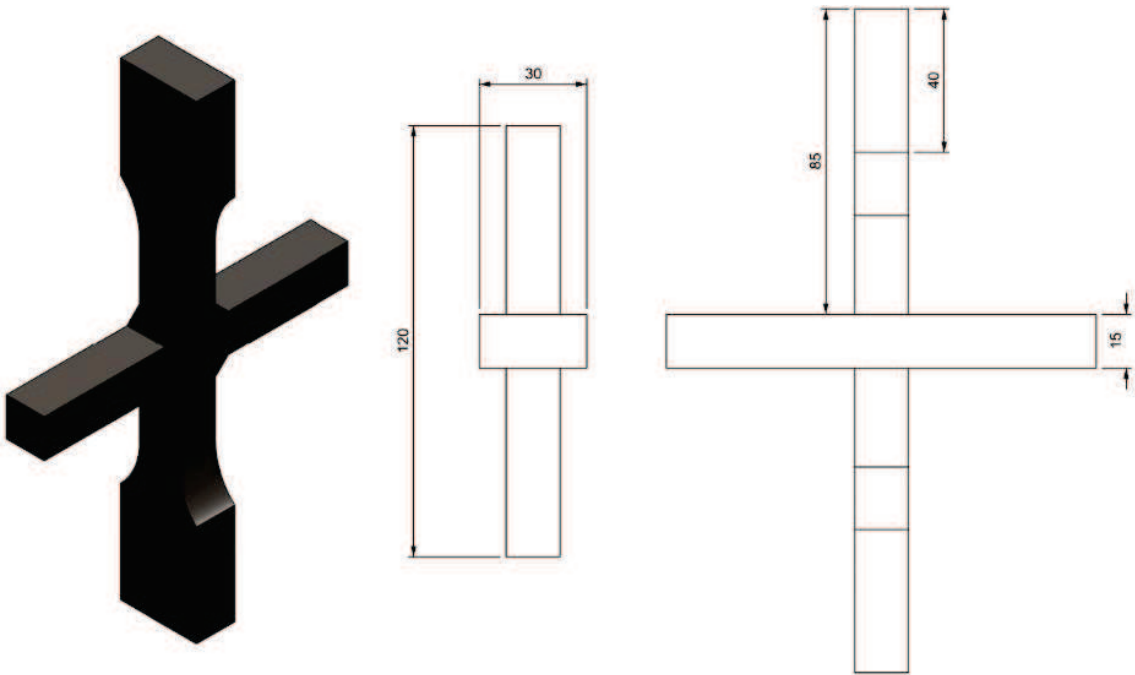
Tensile test specimen, dog bone, with fillet welding.
